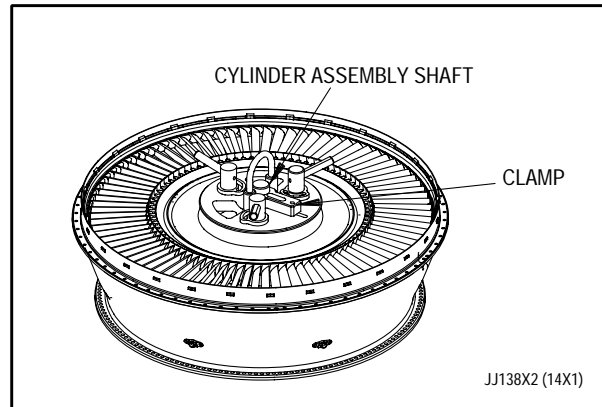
Fourth Stage Turbine Disk, Blades and Air Seal - Installation (Sheet 5 of 7)
